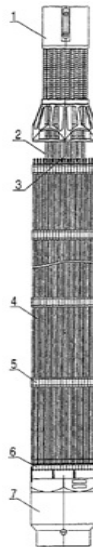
General view of fuel assembly 1 - Head, 2 - Guide channel, 3 - Central tube, 4 - Fuel element, 5 - Spacer grid, 6 - Lower grid, 7 - Nozzle
